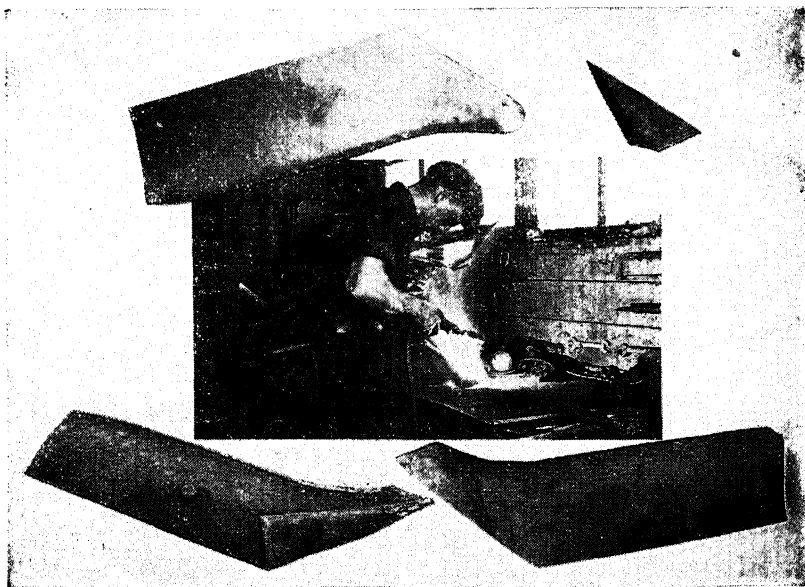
Reclaiming a plow share by arc welding. Top: Worn share with "new process" carbon steel tip which is welded on with mild steel electrode and hardfaced with semi-austenitic alloy steel as shown. Point and cutting edge are then hot-forged to sharpen. Result is shown at bottom.
